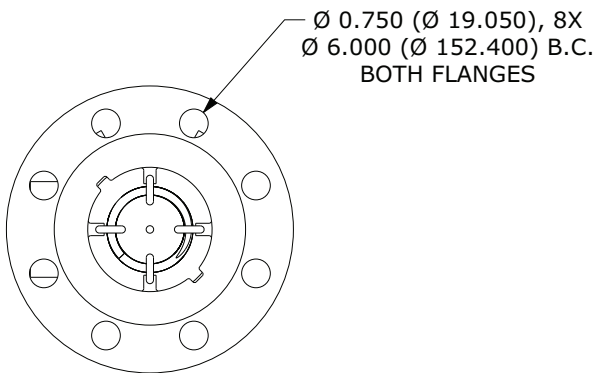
Three-inch (76.2 mm) RuptureGuard mounting
